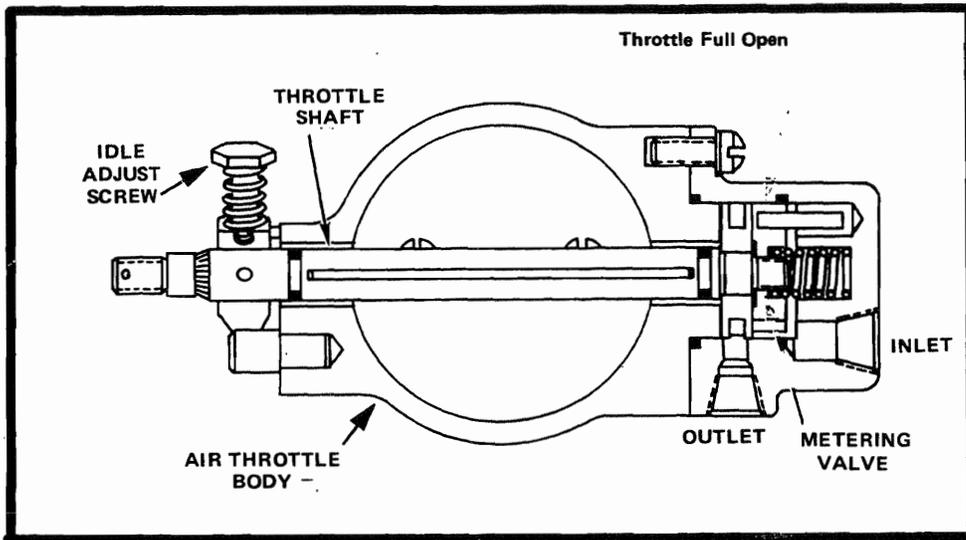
AIR THROTTLE & METERING UNIT
